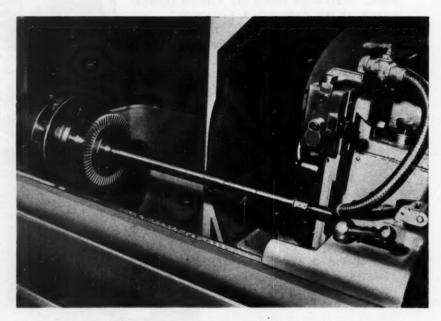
A cylindrical grinder produces an accurate back face on this second-stage turbine wheel.
